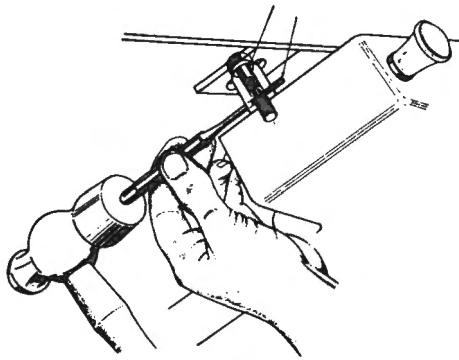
Removing the lock pins from the shroud retaining bolts
